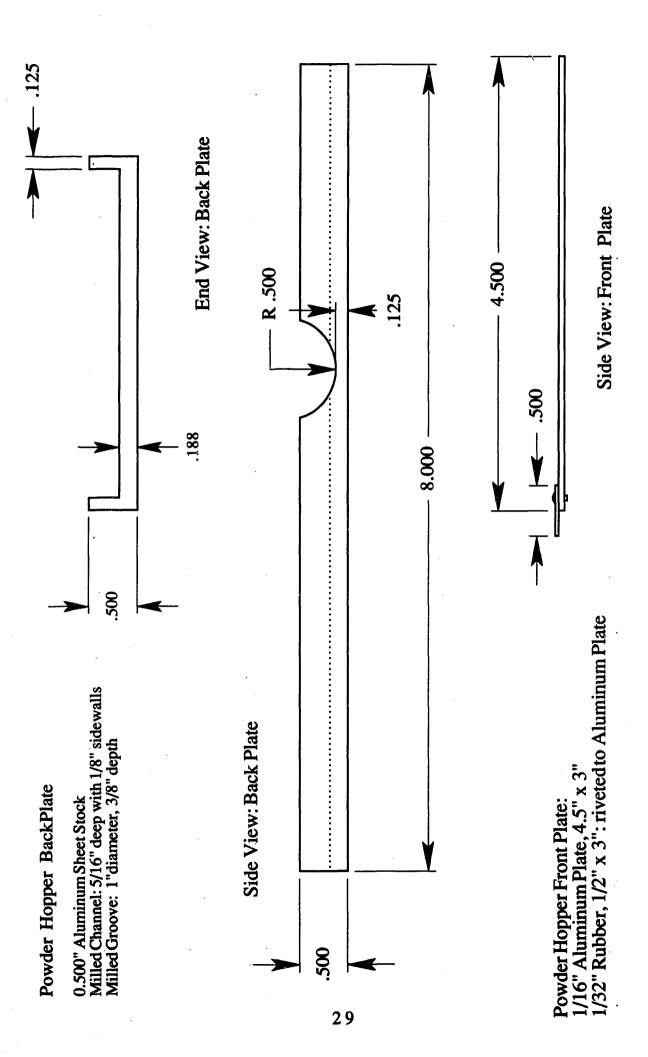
Powder Hopper Parts Drawings: Back and Front Plates
